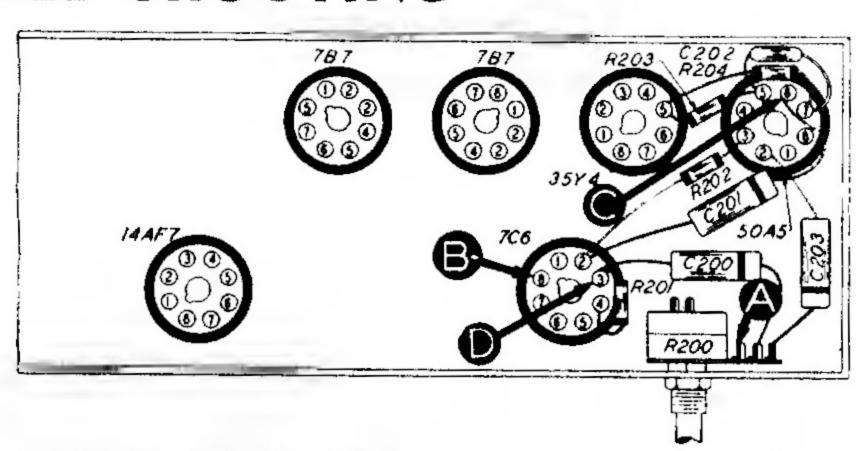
BOTTOM VIEW. SHOWING SECTION 2 TEST POINTS.
